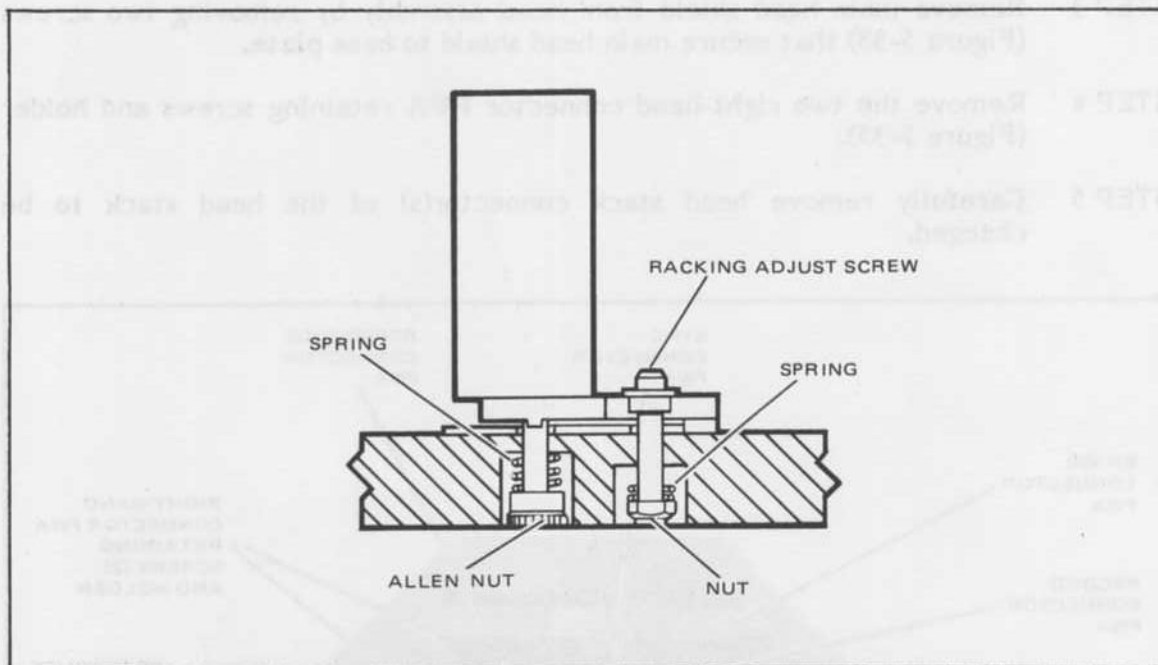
Head Assembly Spring-Loaded Pin Locations, Front View
